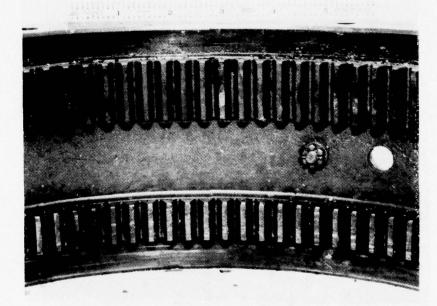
Upper ring gear teeth (top) and lower ring gear teeth (bottom) after 25-minute loss-of-lube test of optimized transmission configuration number 1.
